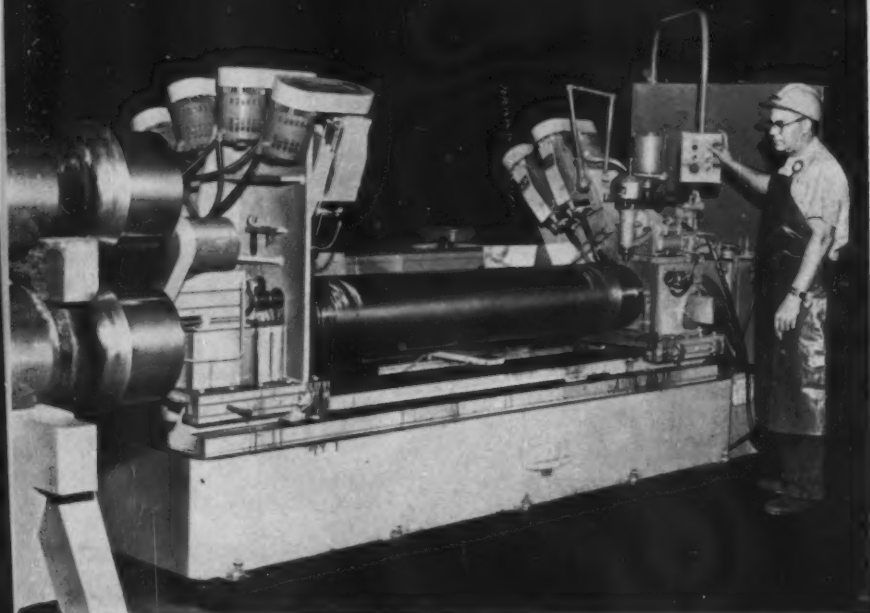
Here, the pedestal section and formed head are welded to the motor case by the submerged-arc process. Each weld is X-rayed 100 per cent.
